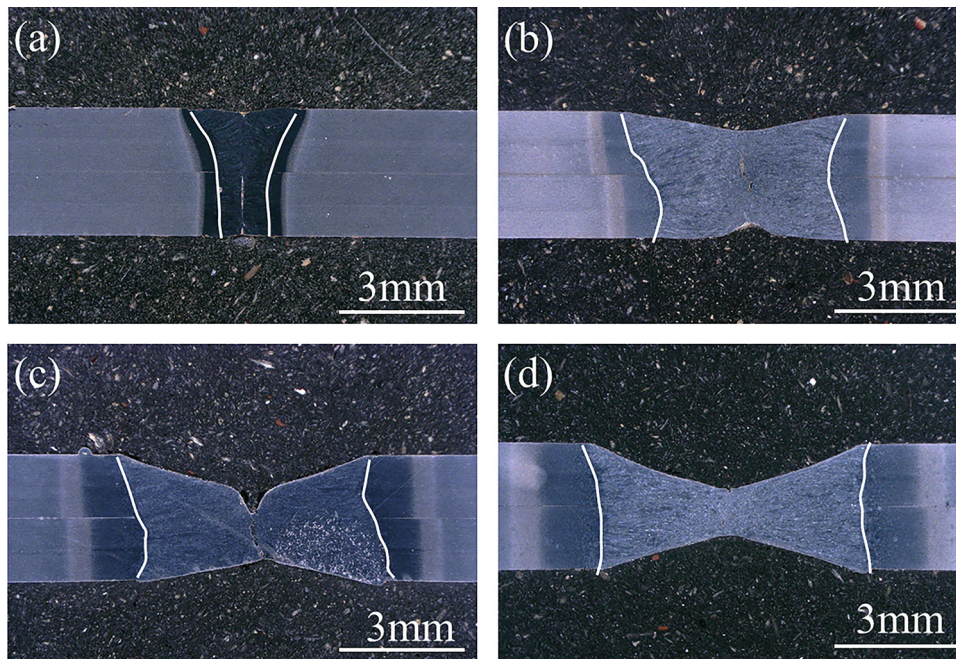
Cross-section views of the laser spot welds obtained by conventional LSW with different heat input: (a) 250 J; (b) 1750 J; (c) 3250 J; (d) 4750 J.
